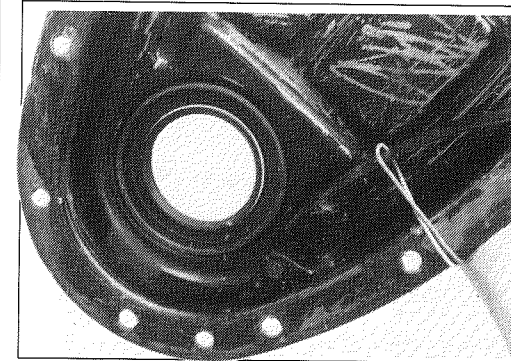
Thread a piece of string or flexible wire around the tensioner and pull into its operating position against the side of the cover.
